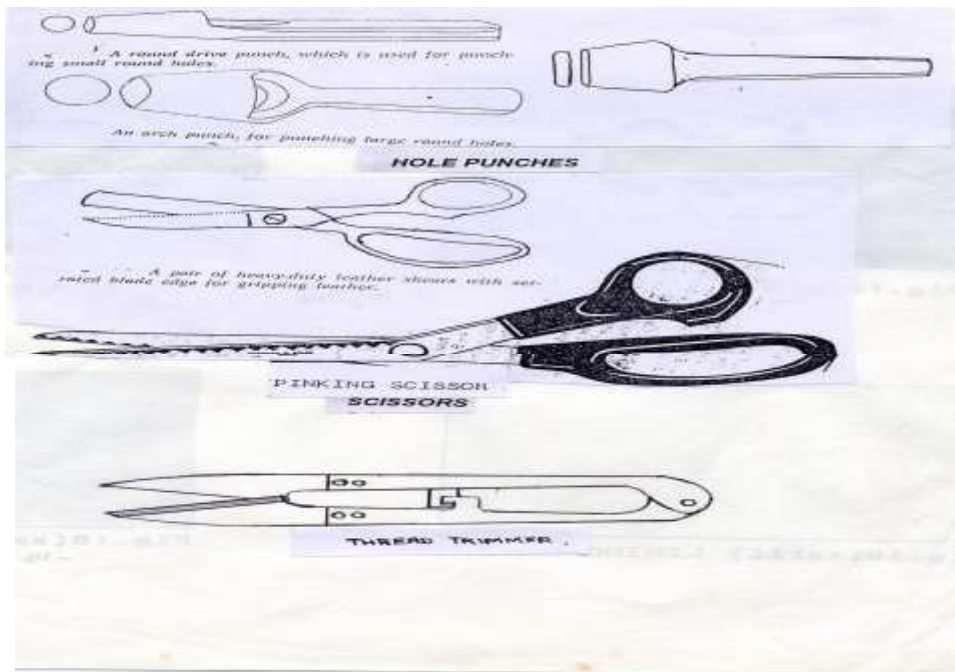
Hole-punches, ordinary scissor, pinking scissor and thread trimmer
